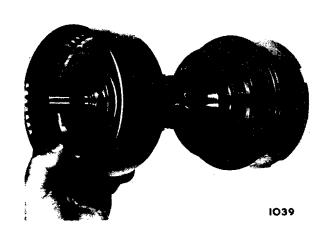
Assembling the rear clutch over the primary sun gear ring
